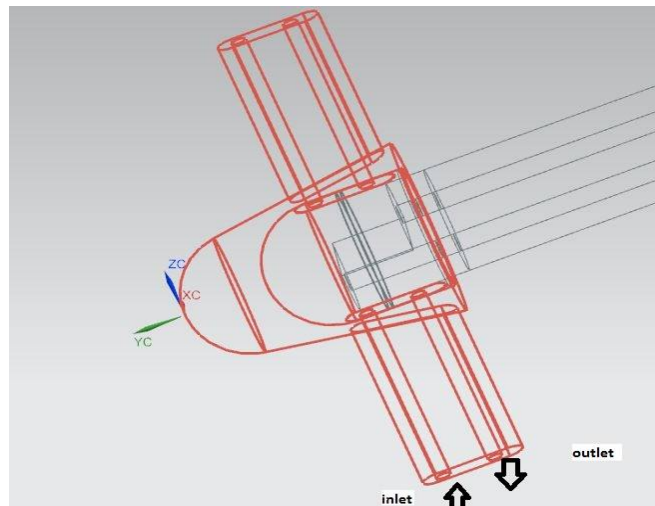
Cross sectional view of hub and shaft including passages for inlet and outlet of helium
